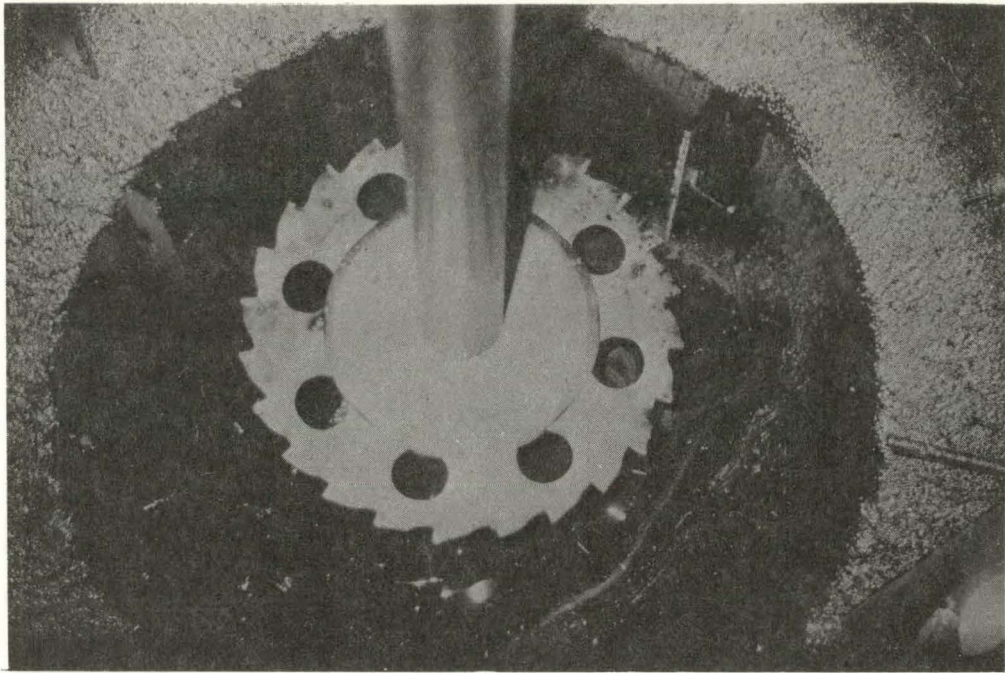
TUNGSTEN CARBIDE TIPPED BLADE MOUNTED IN DISPERSER
